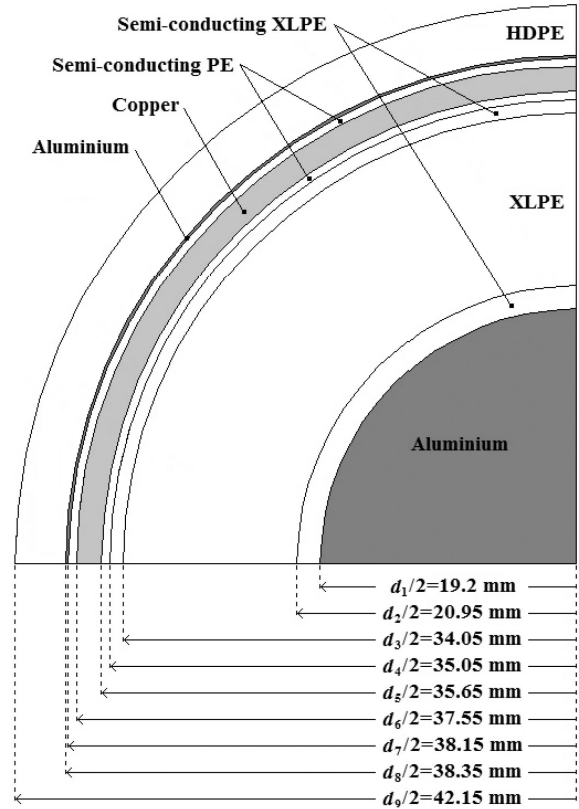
Dimensions of the construction elements of the AXLJ 1 x 1000/190 mm² 110 kV cable
